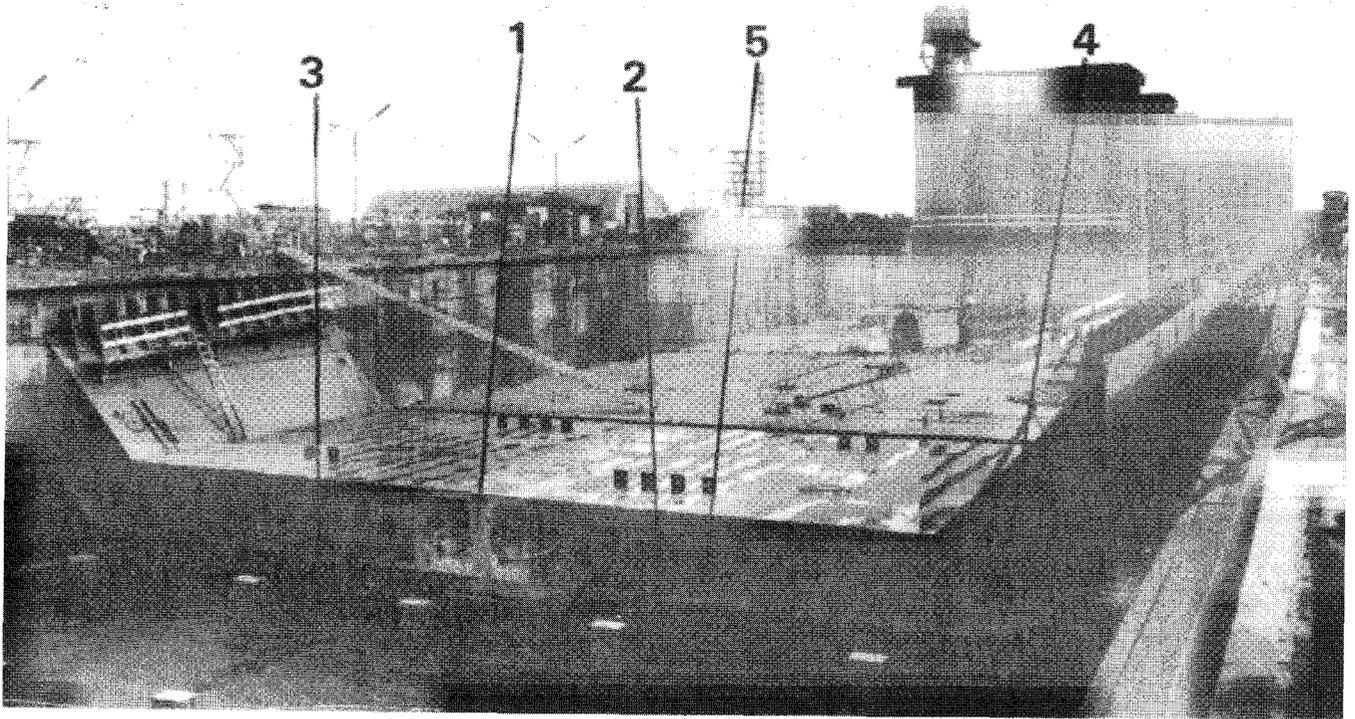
THE 60,000-DWT BULK CARRIER PORT VANCOUVER UNDER CONSTRUCTION BY BURMEISTER & WAIN
